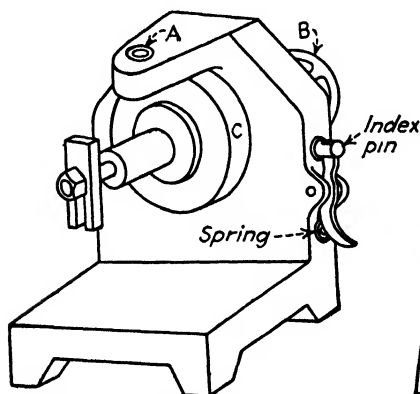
Rotary or indexing jig. Bushing at *A*, handwheel *B* turns index plate *C* when index pin is withdrawn. Work is held by hairpin clamp.
